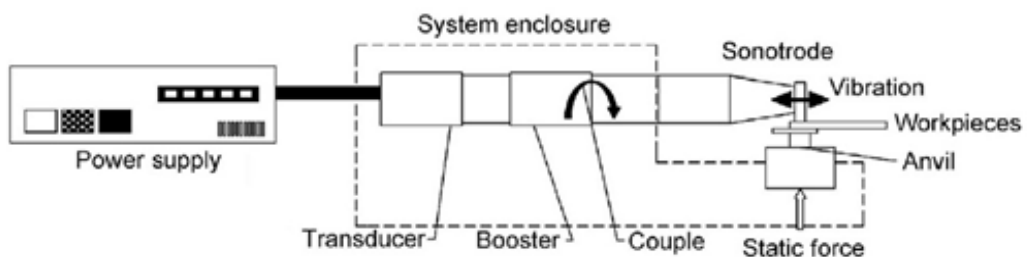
Lateral Drive Ultrasonic Welding System, (Source: EWI)
